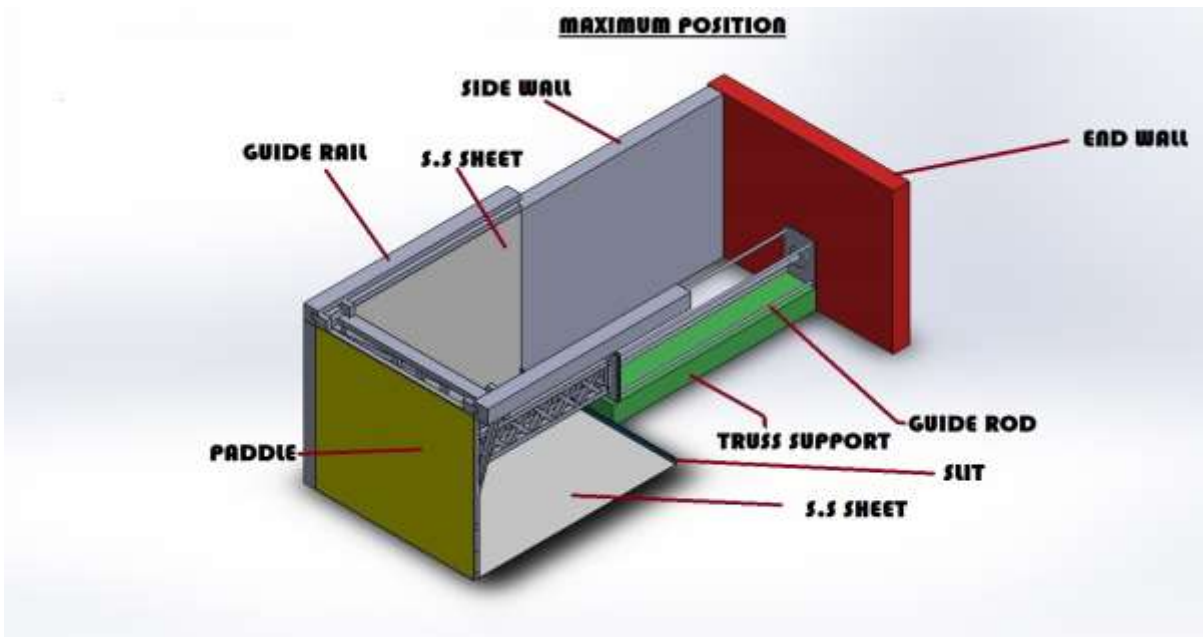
Schematic arrangement of paddle assembly at the end of stroke
